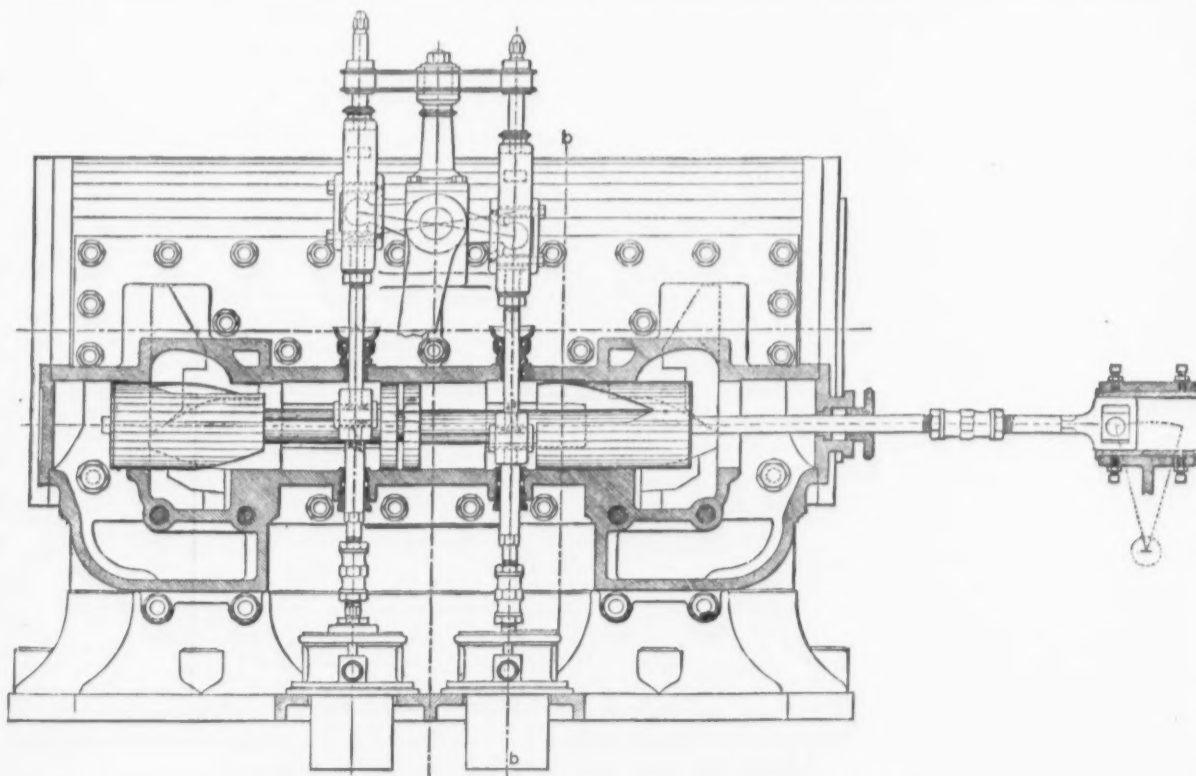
Vertical Section Through Steam-Chest and Elevation of Cylinder.
